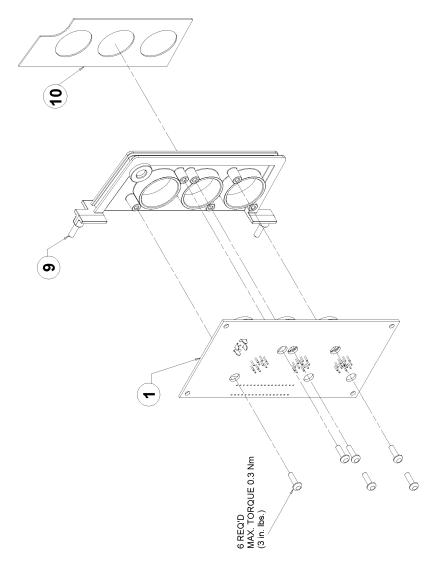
Assembly Drawing (Sheet 5) - Side Connector PCB/ Panel/Label
